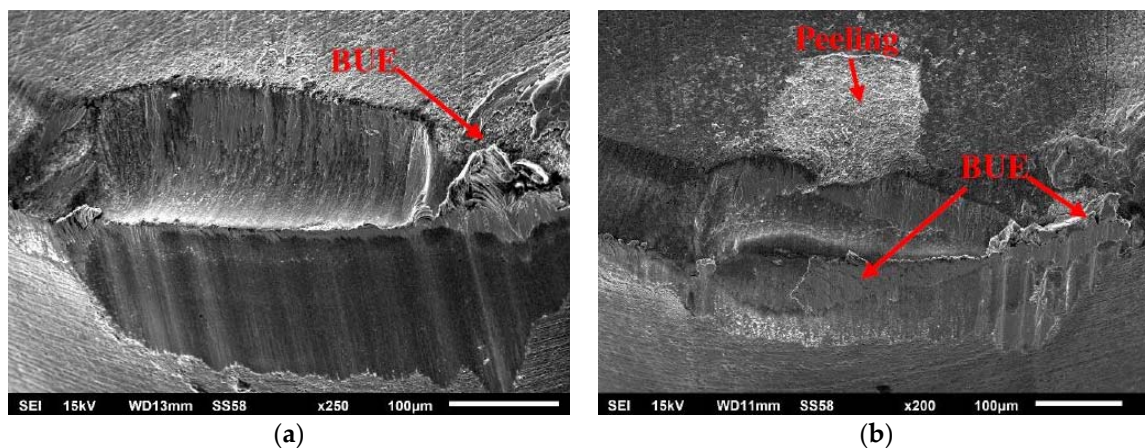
Worn rake and flank faces of ceramic insert after cutting (a) T1 steel to 3304 m; and (b) D2 steel to 3468 m.
